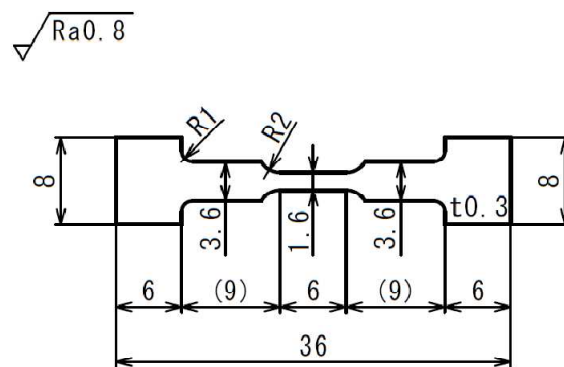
Dimensions of macroscopic and microscopic DIC tensile test specimen.
